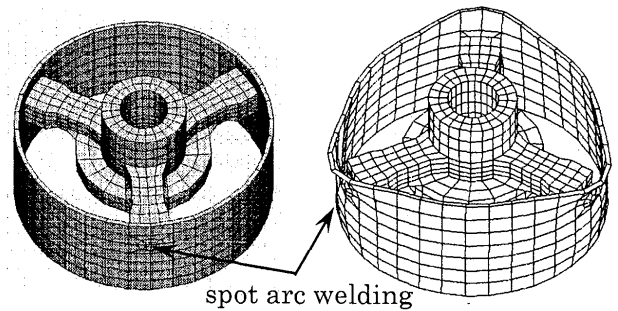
Welding deformation of compressor part under arc spot welding.
